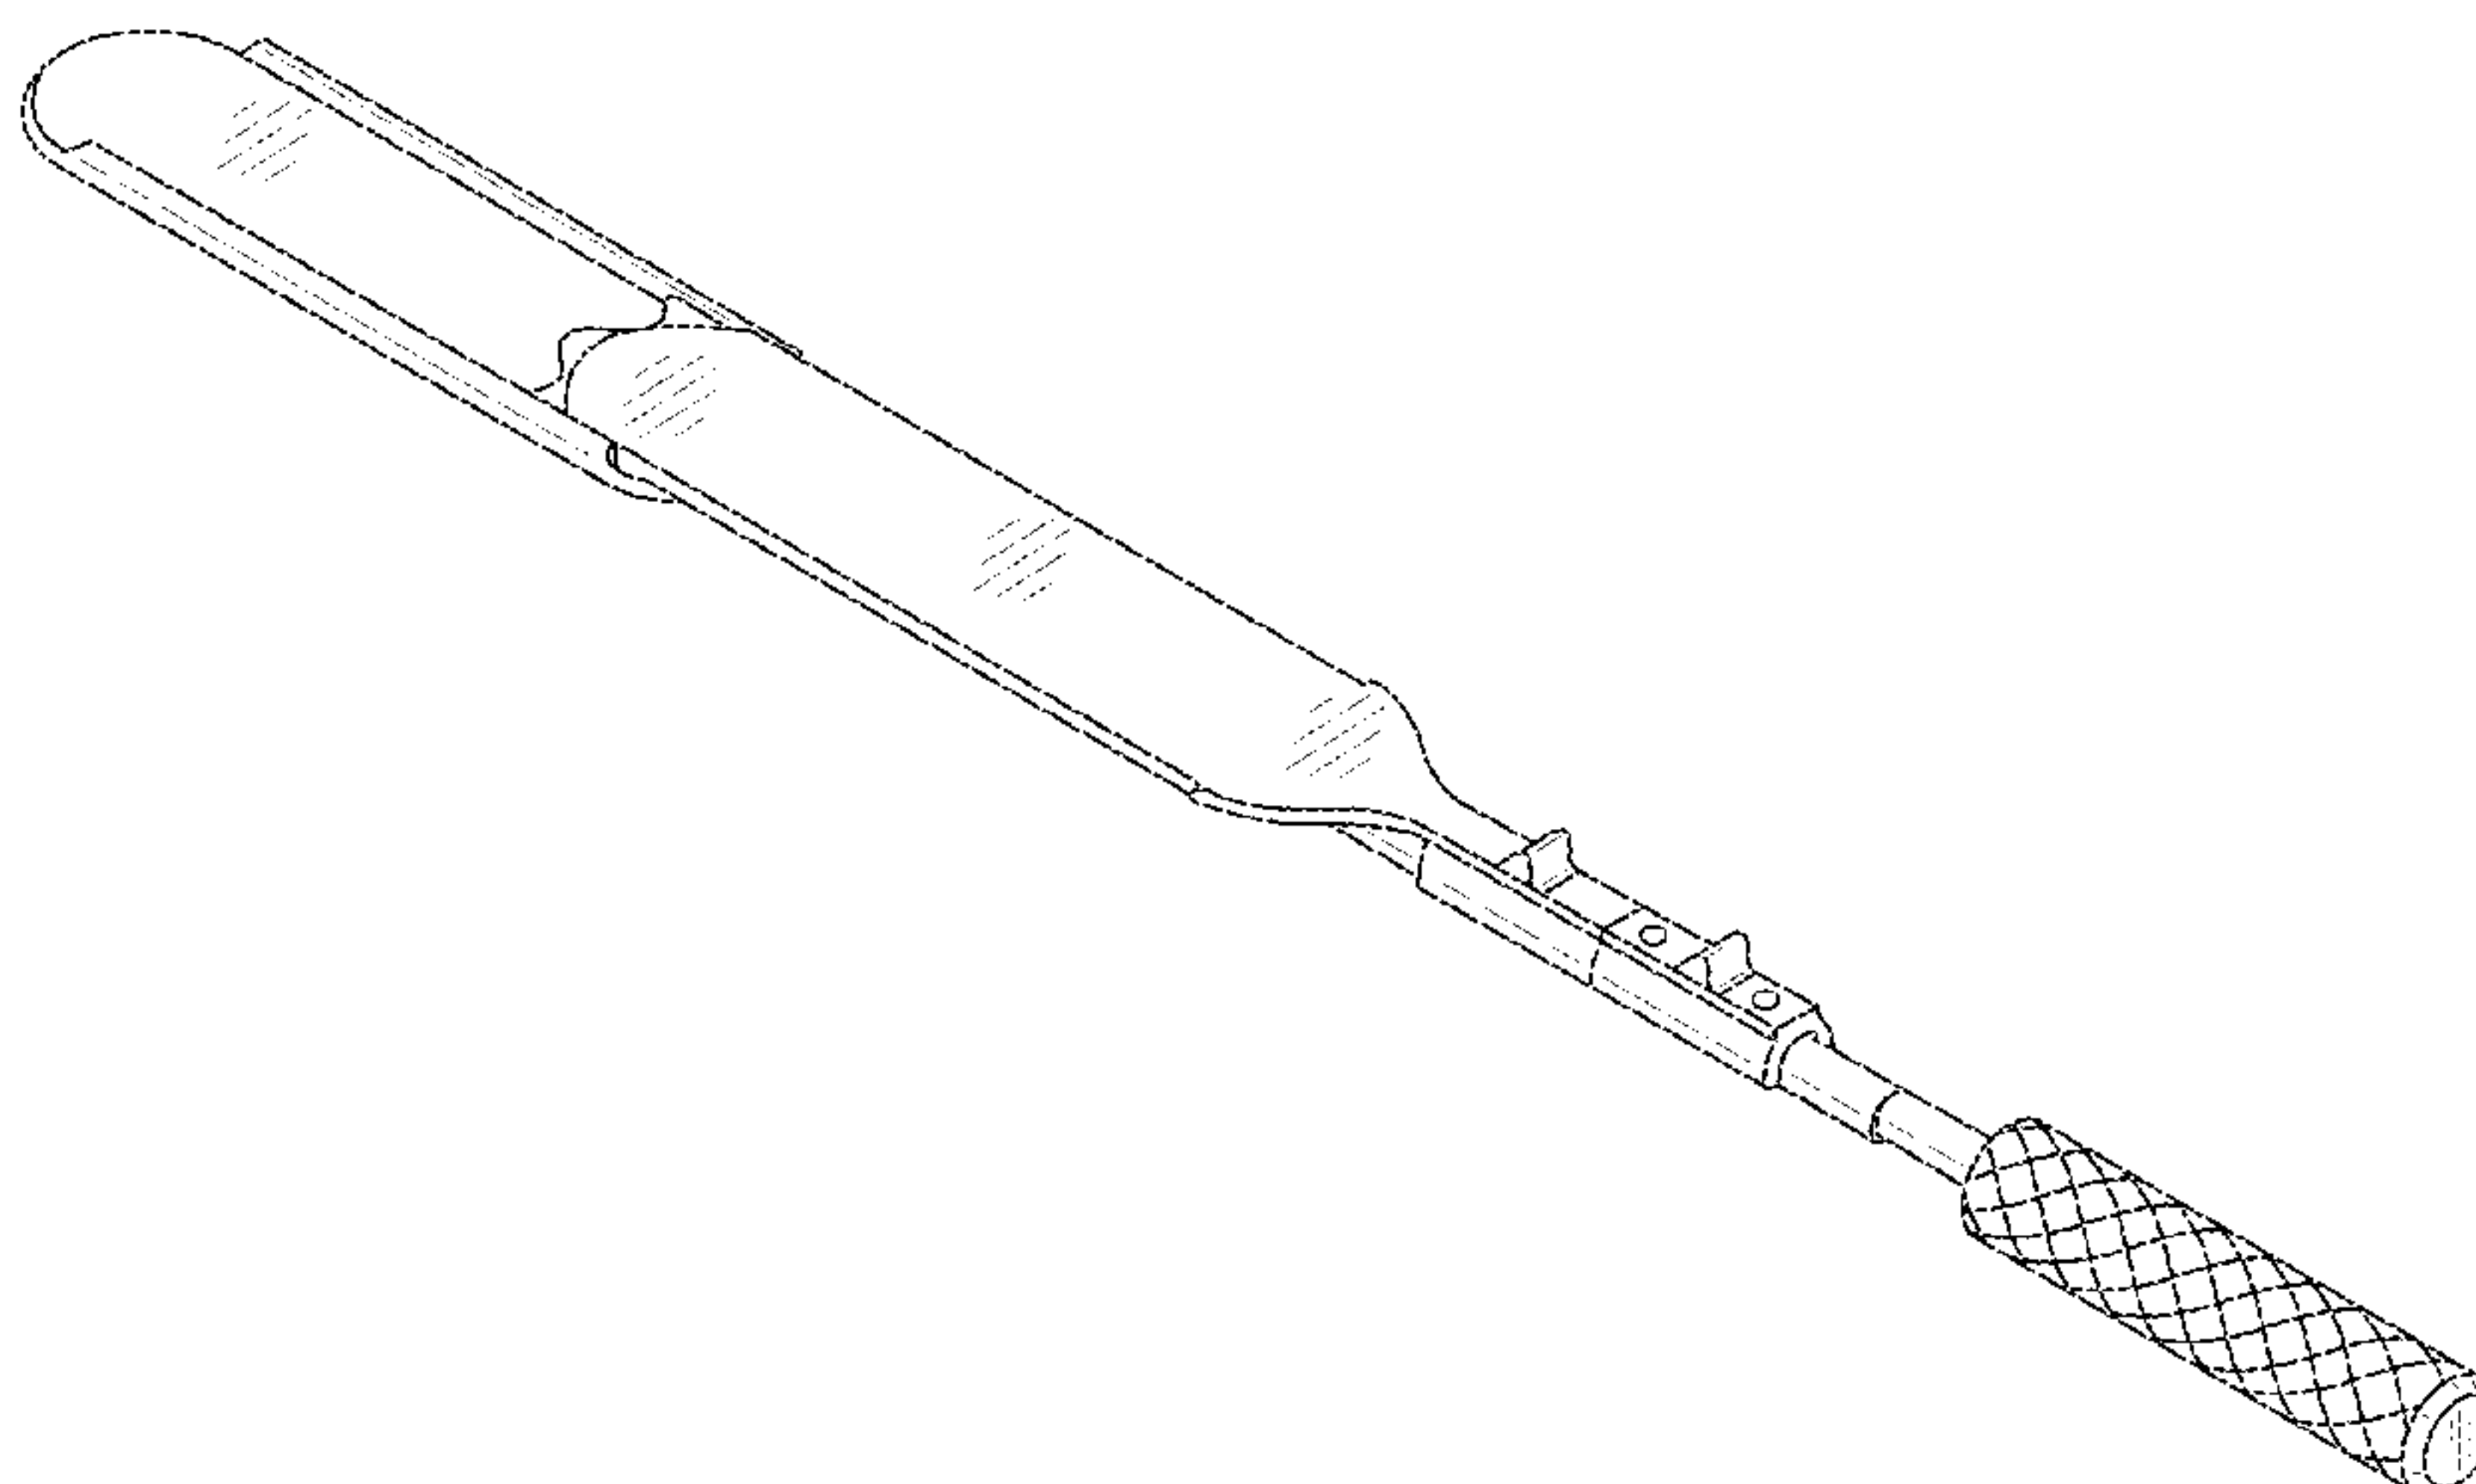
is a top view of the deployment tool shown in FIG. 1;
